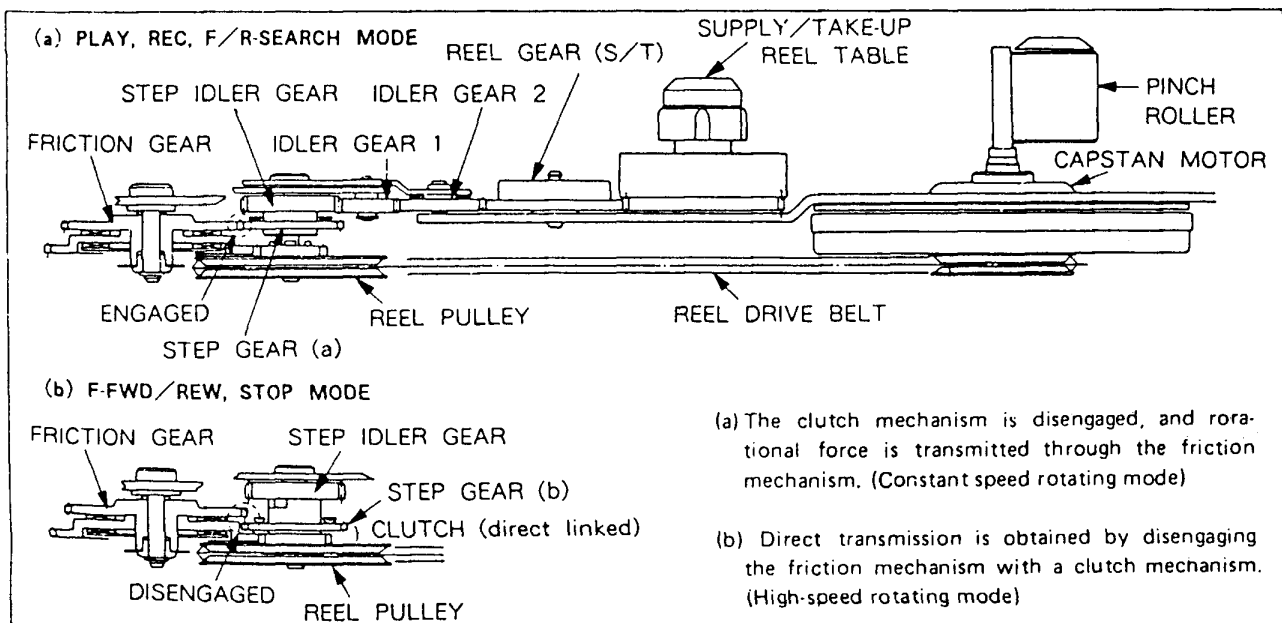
REEL TABLE DRIVE (SIDE VIEW)
